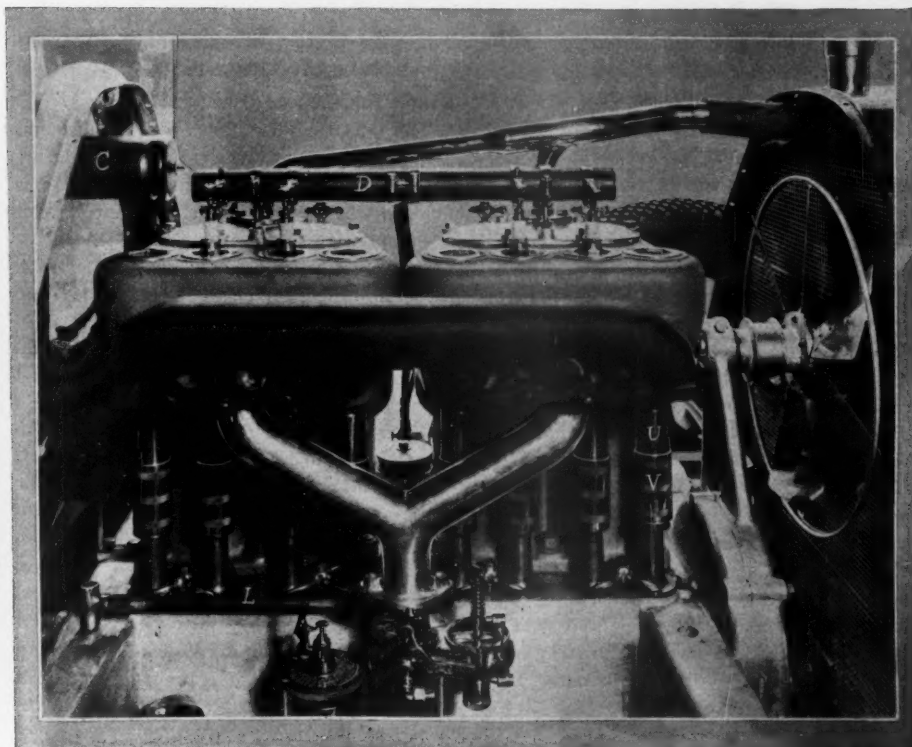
VALVE SIDE SHOWING SPRING COVERS
